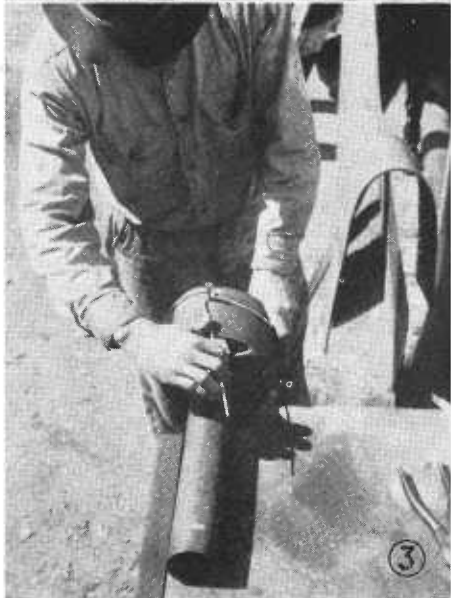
Using a short section of pipe of about 8 inch in diameter which is welded to a longer section of 3 inch pipe, as a jig, the wire is pushed into a hole to a depth of about $\frac{3}{4}$ inch. Then the wire is bent at right angles to form the loop which will be closed to tie to the upright. After pushing the wire into the hole it is wrapped around the pipe making a circle of about 8 inches in diameter.
